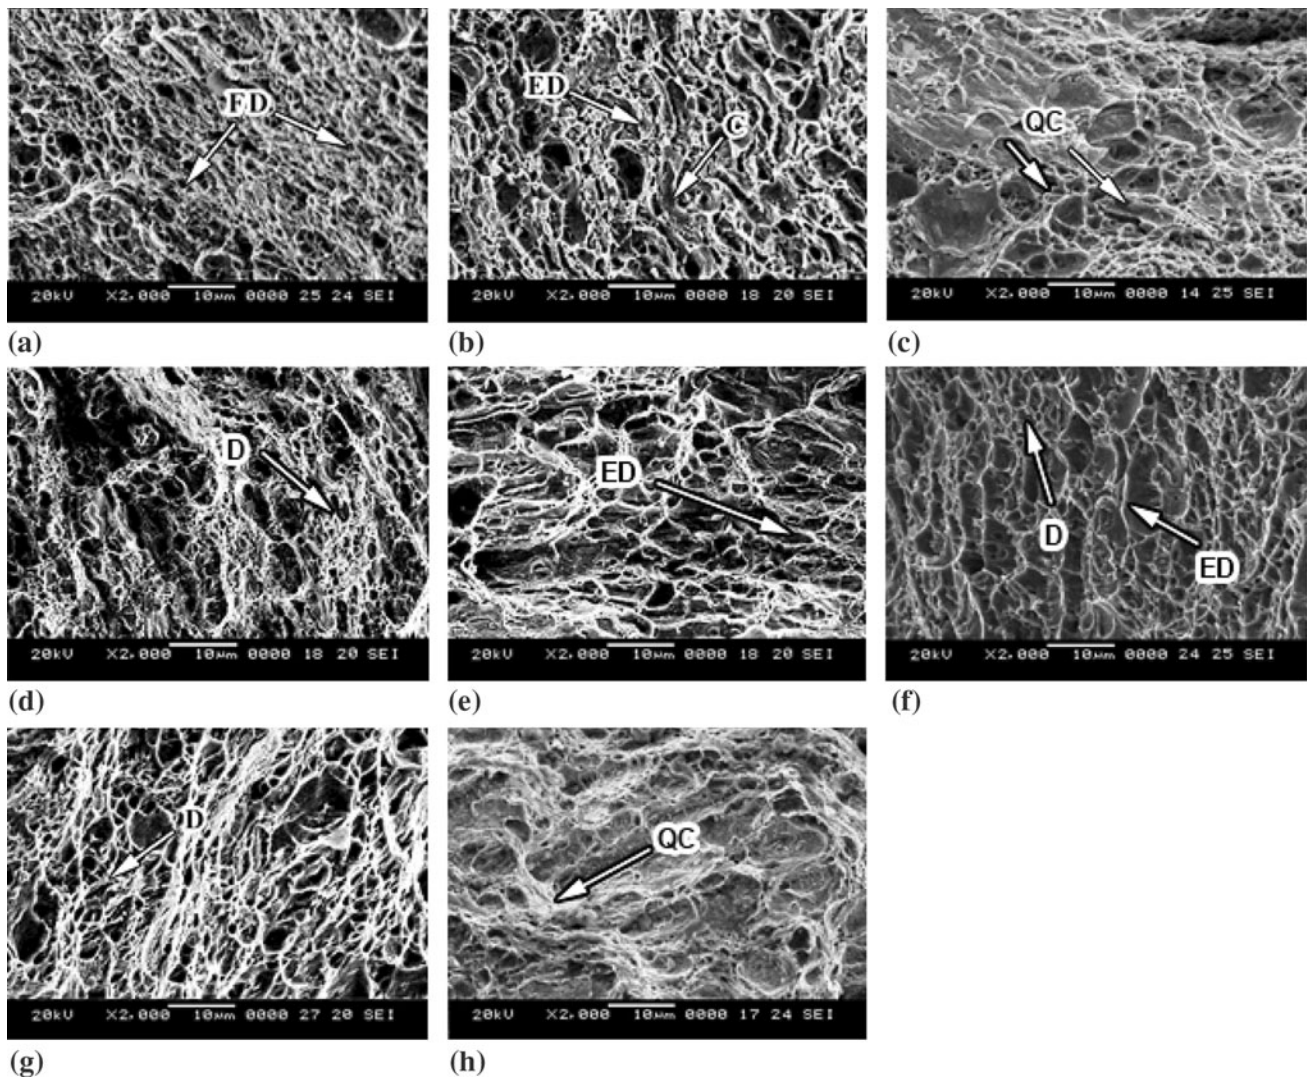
SEM fractographs of tensile and impact specimens. (a) FSW tensile—all weld, (b) FSW impact—WM, (c) FSW impact—HAZ, (d) LBW tensile, (e) LBW impact—WM, (f) LBW impact—HAZ, (g) base metal tensile, (h) base metal impact. D, dimples; FD, fine dimples; ED, elongated dimples; QC, quasi cleavage
